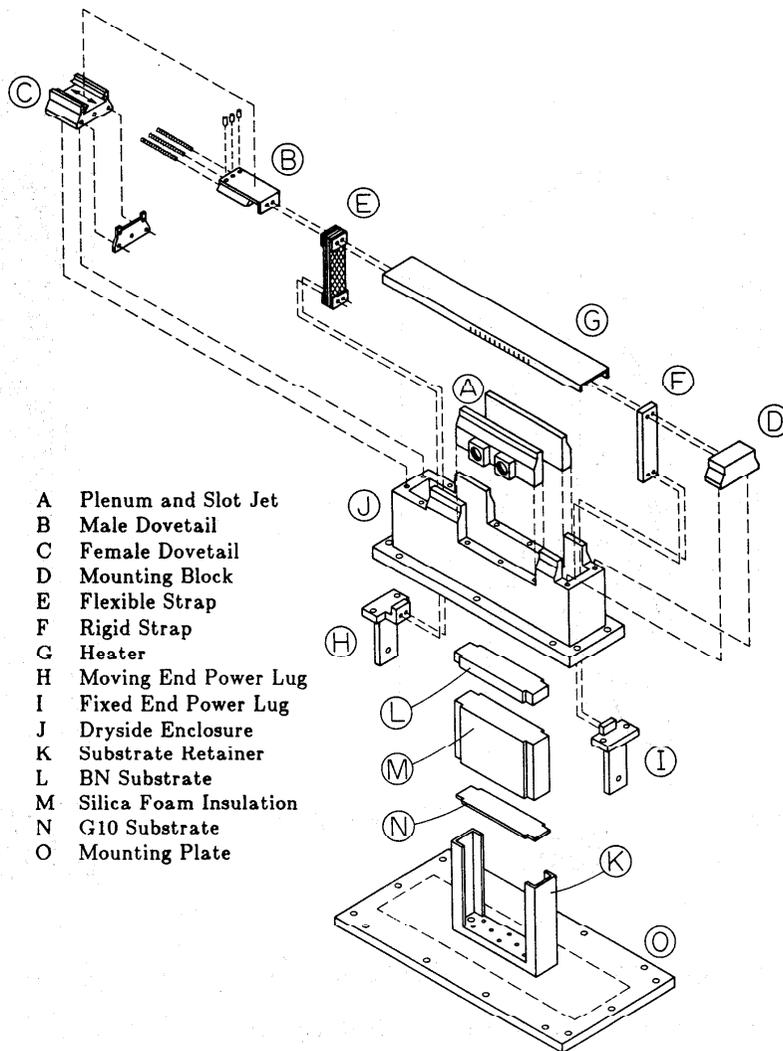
Assembly drawing of heater module used to simulate nucleate and film boiling in quenched strip metal products.
